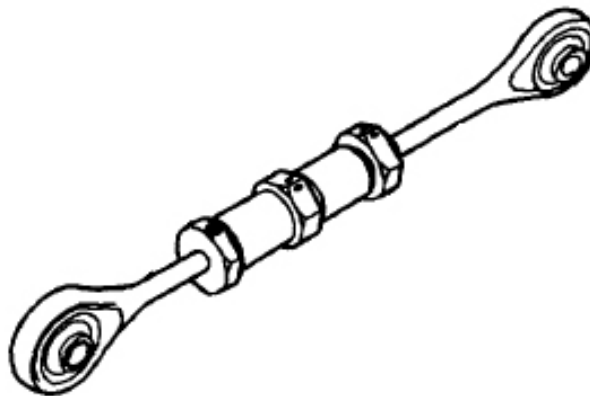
Main Rotor Pitch Link Assembly (AH-64A/D)
